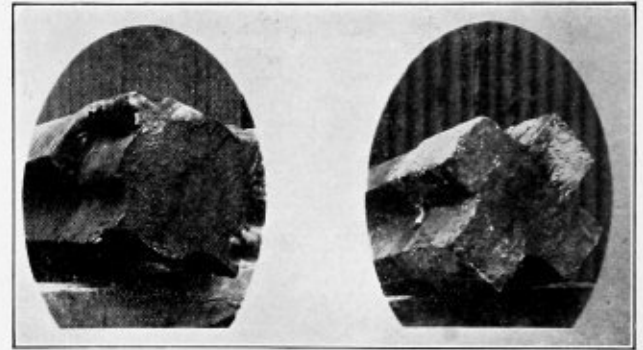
Steel Roll Wobbler Worn and Repaired by Arc Welding
